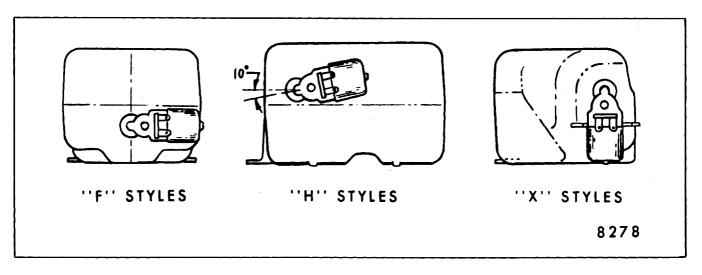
Motor and Pump Assembly Positioning to Jar
